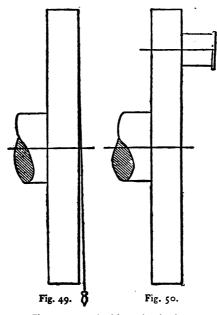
Crank disk out by plumb. Fig. 50. Crank pin put in crooked.
